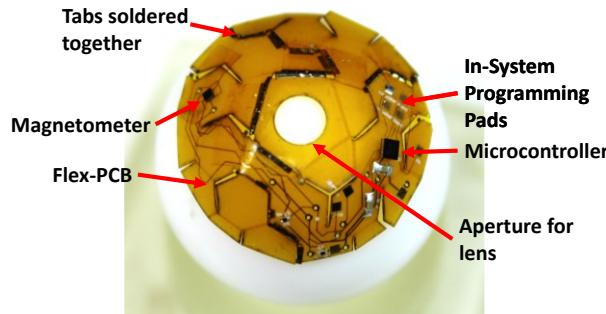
HMC 5883L magnetometer on flexible PCB for smart contact lens.
